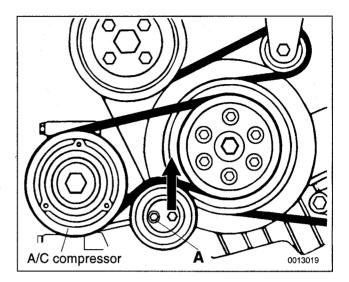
To access tensioner retaining bolt, remove trim cap from drive-belt tensioner.
